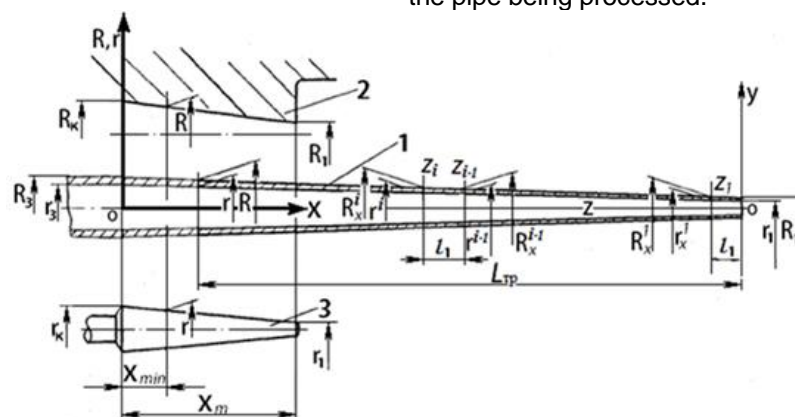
Scheme of forming a conical pipe of given dimensions: 1 – tubular product being formed; 2 – reaming of the crest of the stream of calibers; 3 – mandrel
